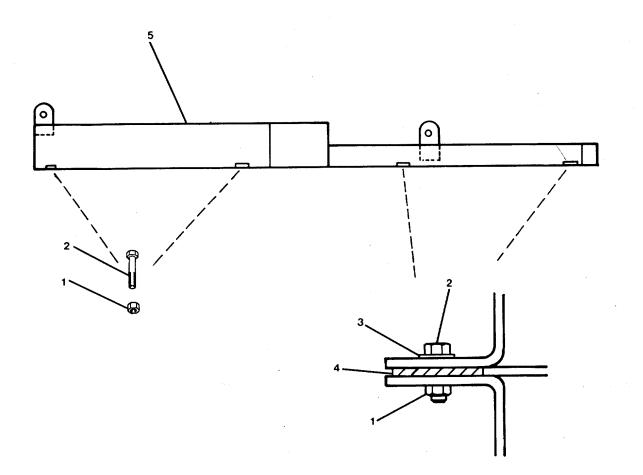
Bowthruster Sub-Base Assembly.
